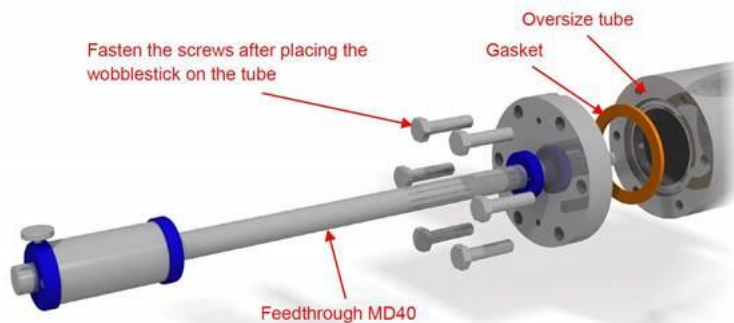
Mounting arrangement, screws used: M6x20 hex-headed or cylindrical-hex (Allen)
